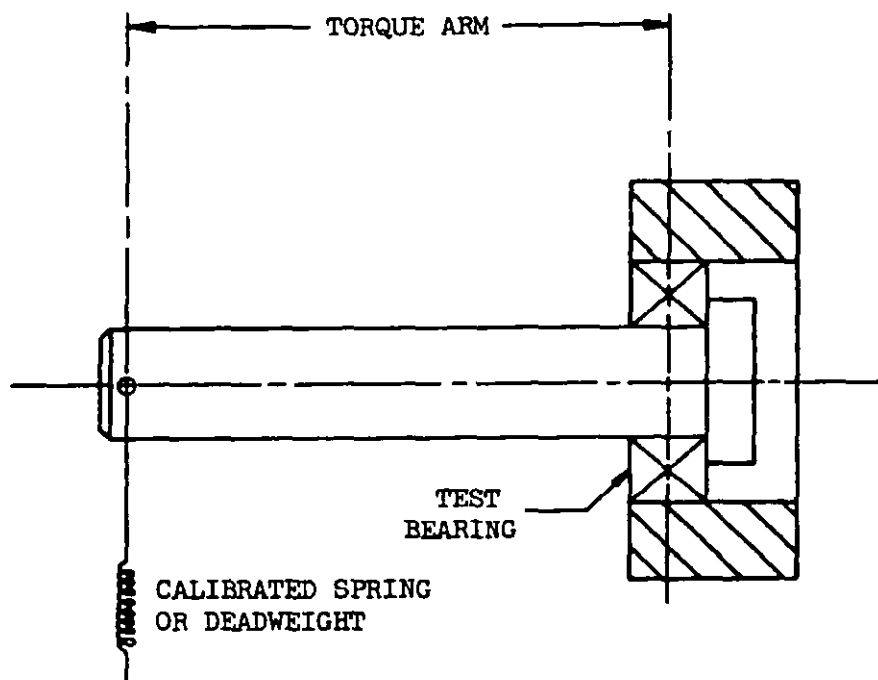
Test fixture used to determine torque required to dislodge seals in "KSP" bearings.
